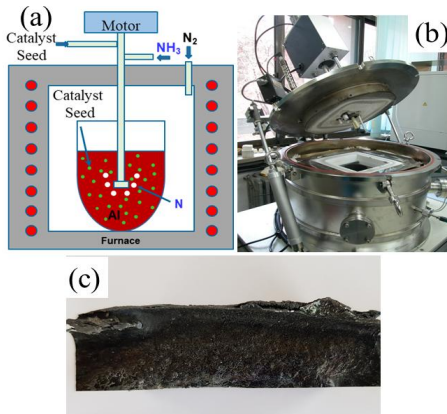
(a) The schematic drawing of mechanism of melting machine, (b) Melting machine for high temperature and pressure casting (c) Photos of as-cast samples of Al-ALN composites
